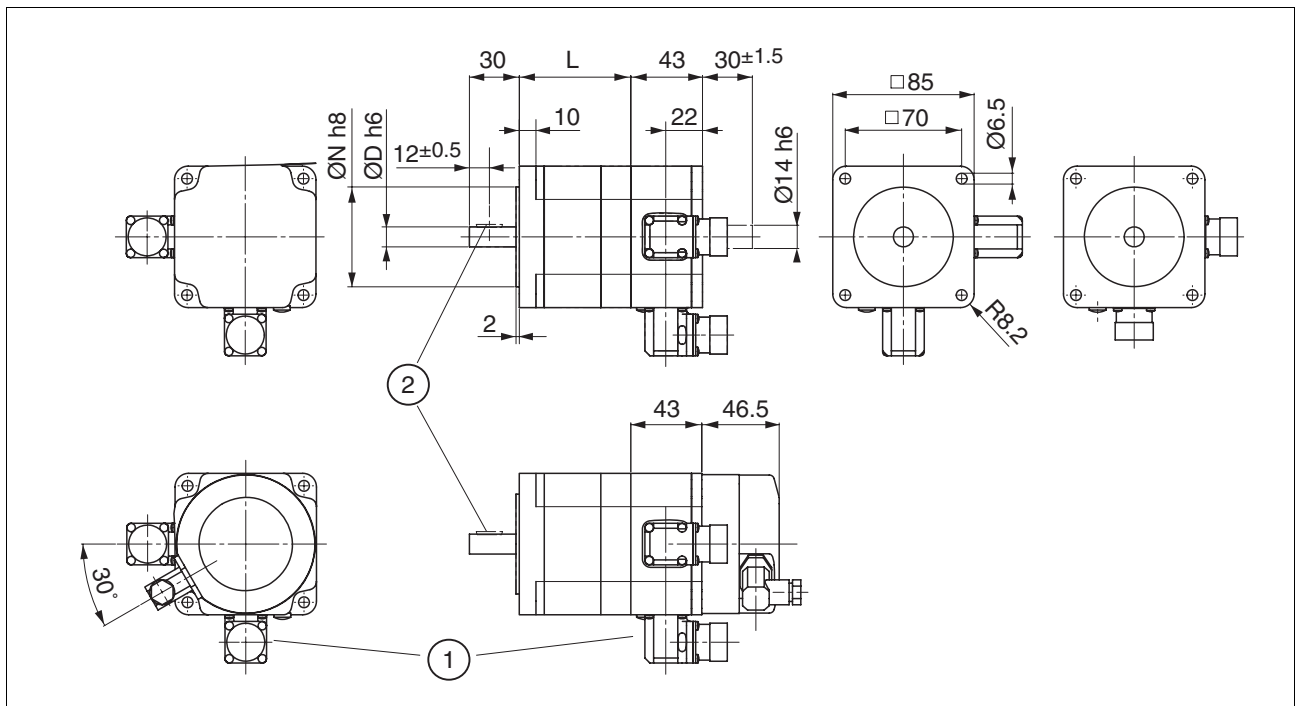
BRS39 dimensional drawing connector version with encoder
